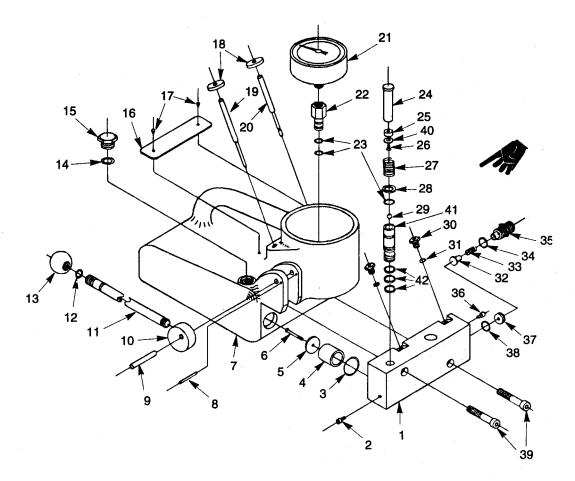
Diesel fuel injector nozzle tester - exploded view.
